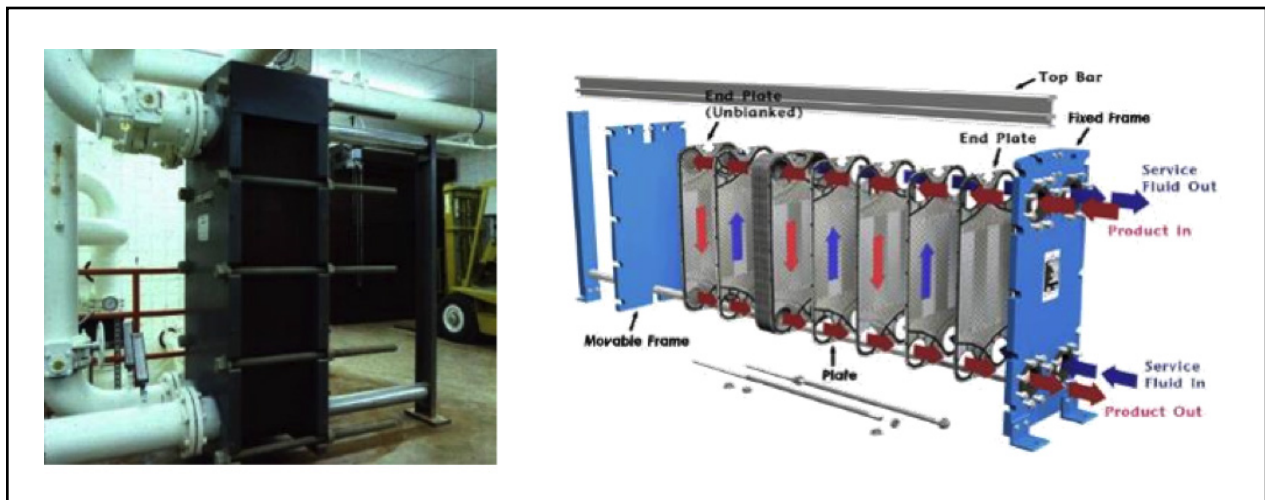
Typical P&F Heat Exchanger Installation and Exploded View Showing Plate Pack
